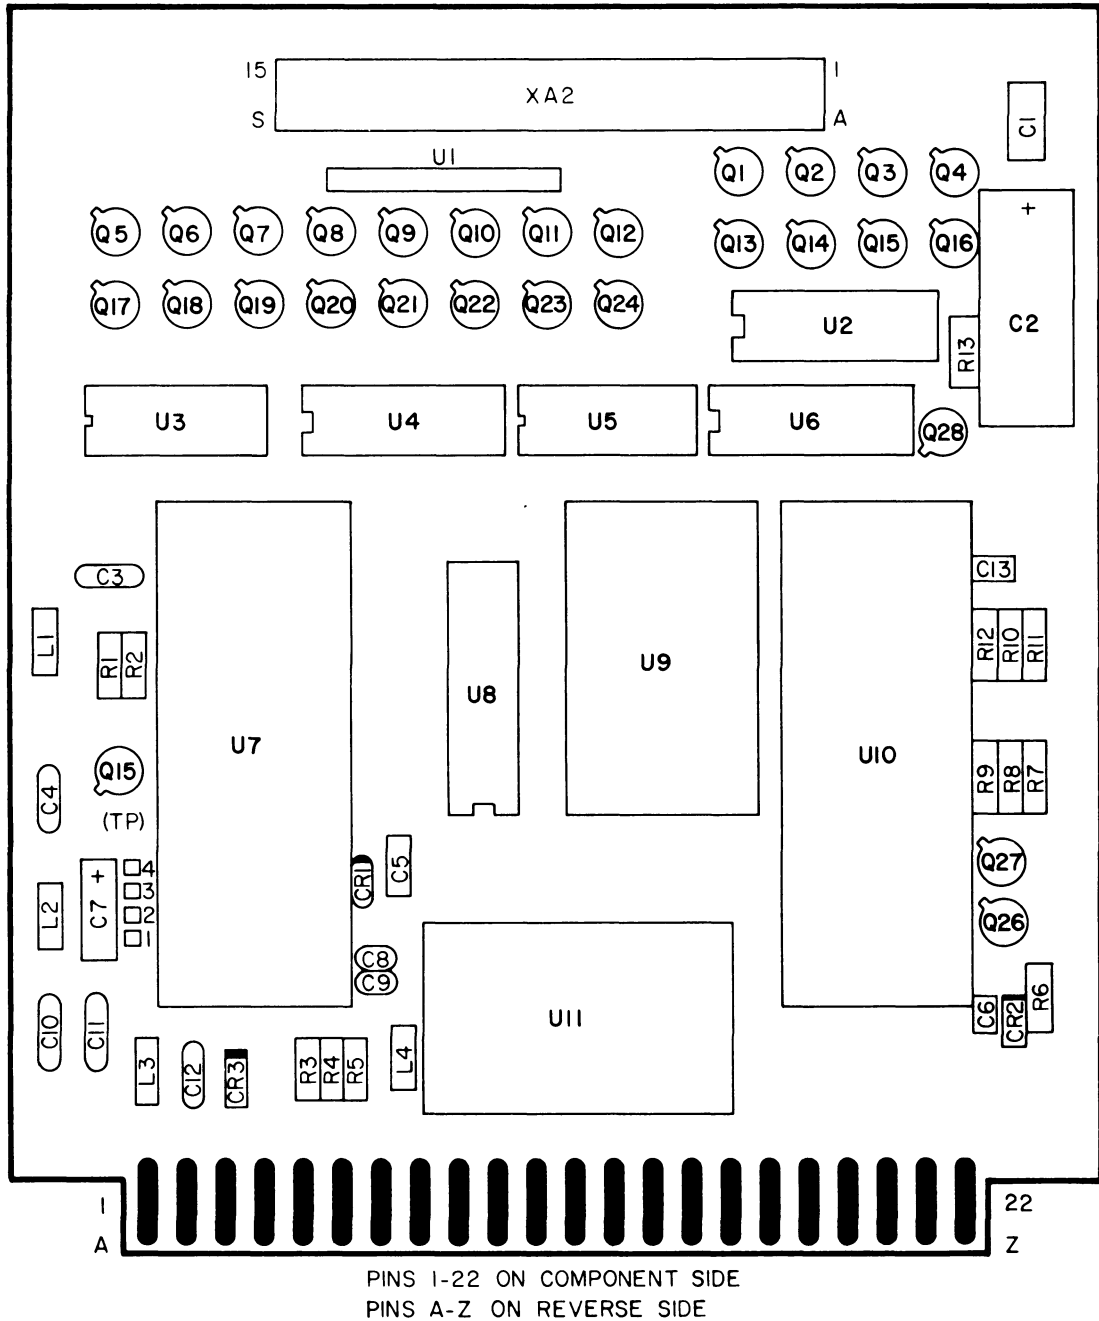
Low Frequency Counter Board Assembly A1A1 Parts Locations
